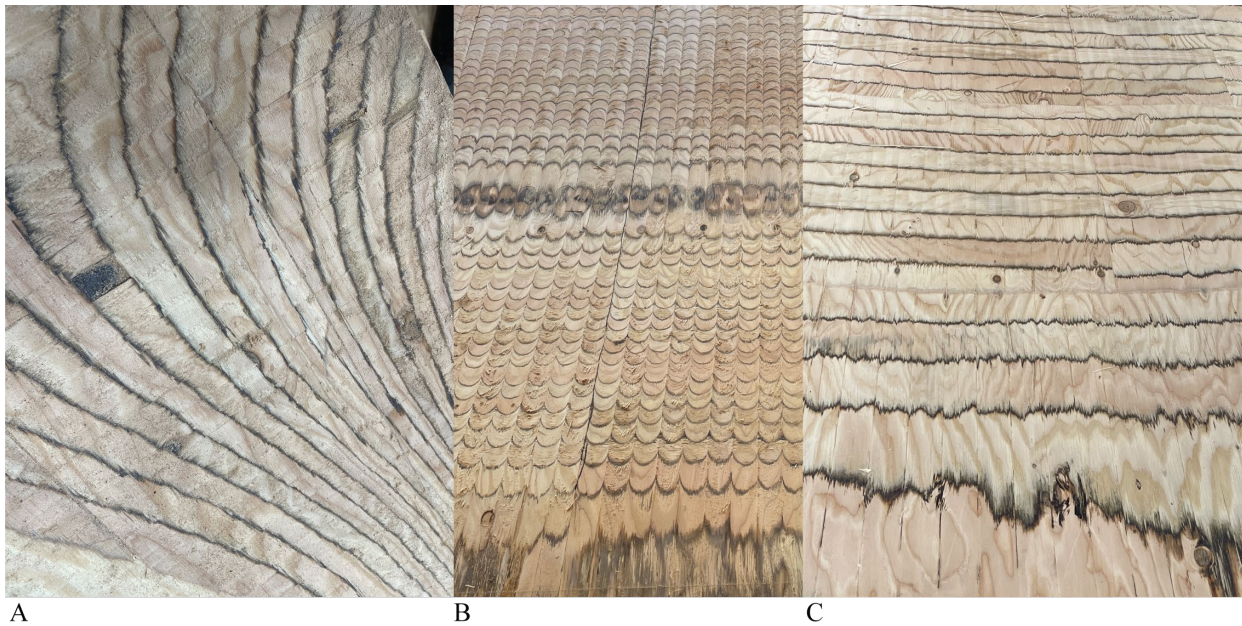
Surface quality finishes. A: 5-axis milling of complex geometry. B: 3-axis milling of simplified geometry. C: 5-axis milling of simplified geometry
